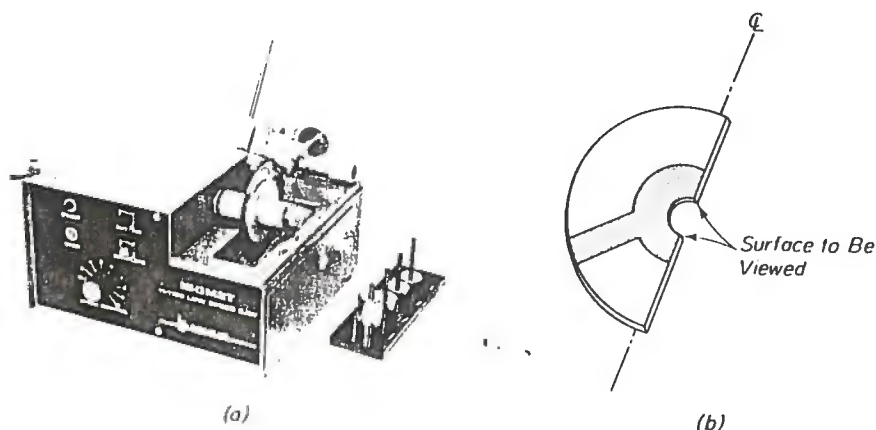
Cutting specimen to expose cross section of PTH with a diamond saw: (a) diamond saw; (b) cut specimen.
